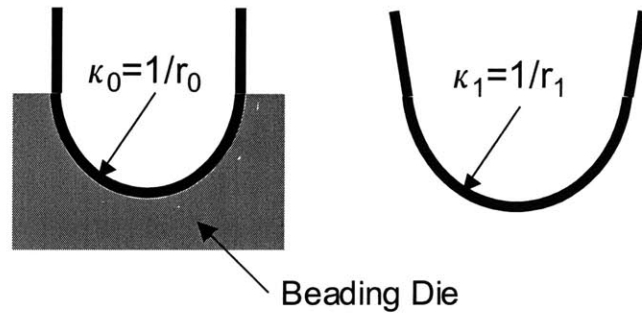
A simple beading die and a piece of sheet metal showing springback
